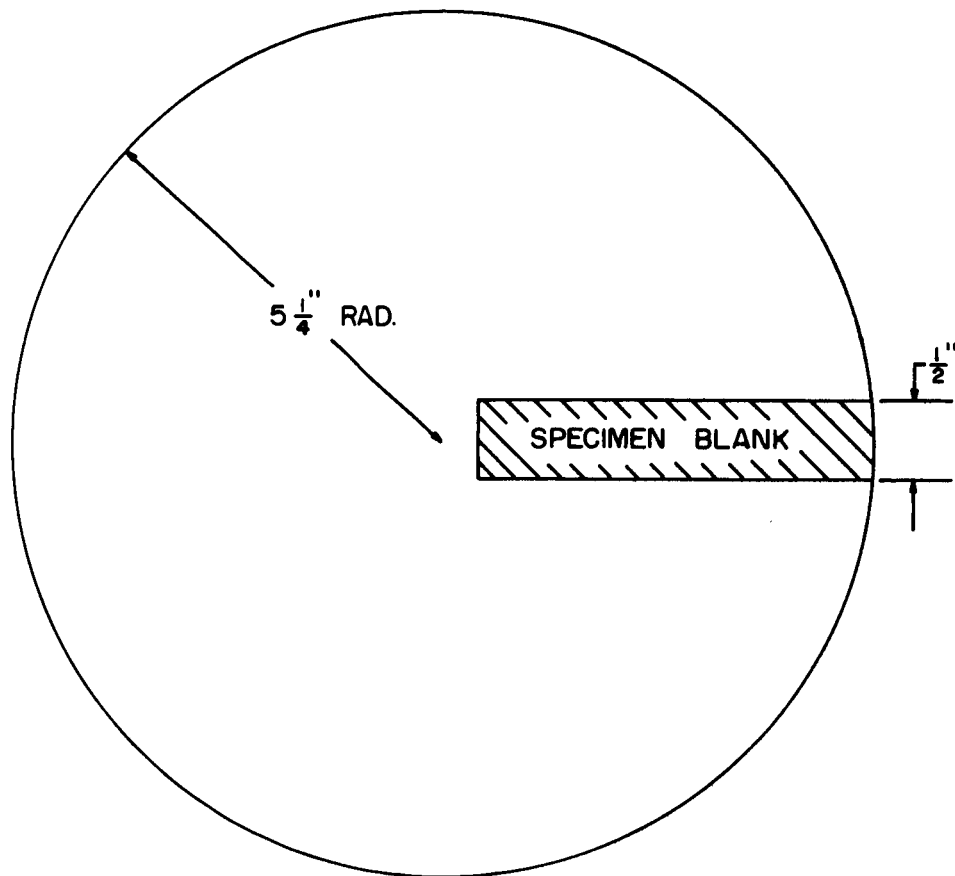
LOCATION OF SPECIMEN ON FORGED DISC.
